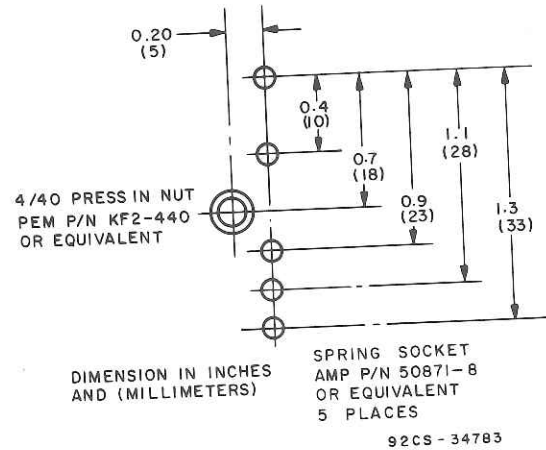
Dimensions of MSIM 20 module mounting positions.
